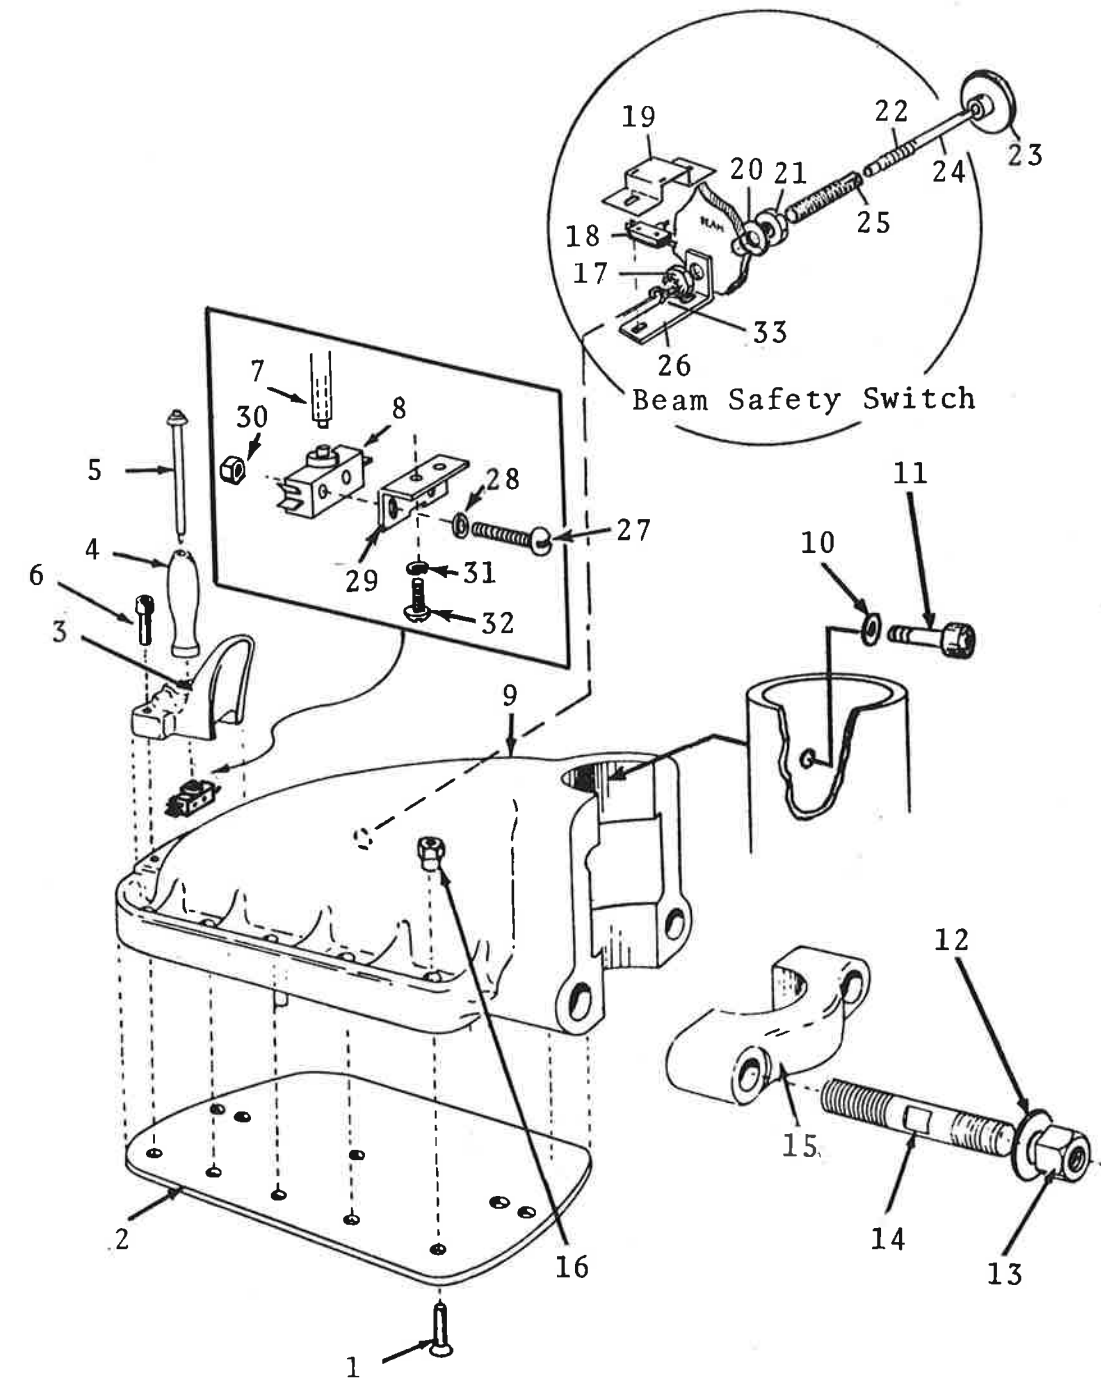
HCM-B2 - Swinging Beam Components - Exploded View
